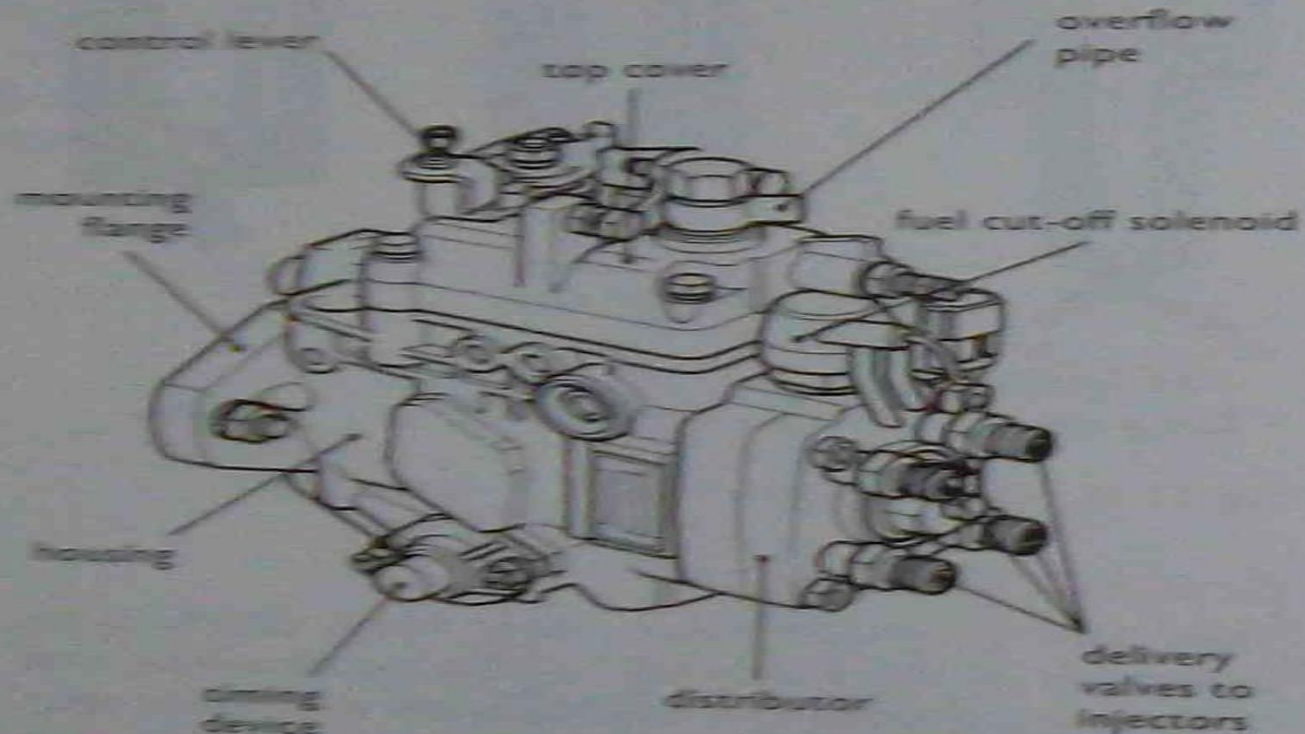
External parts of a distributor-type injection pump. TOYOTA
